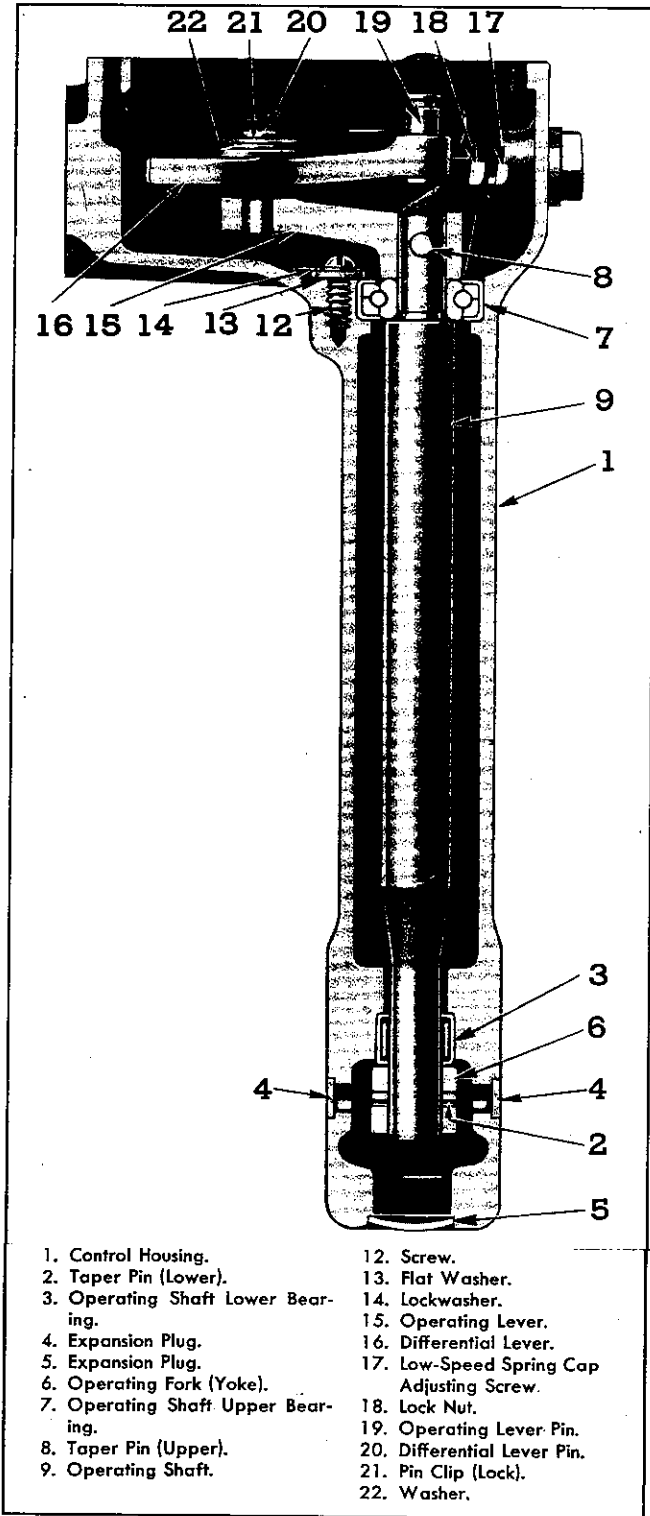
Governor Control Housing Assembly, Including Control Mechanism. (Early "Handy" Model)
